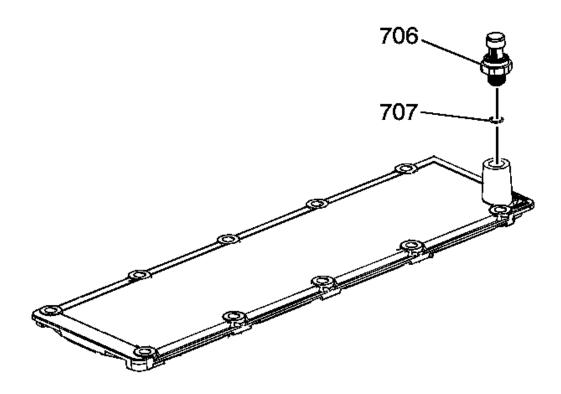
Removing/Installing Oil Pressure Sensor & Washer Courtesy of GENERAL MOTORS CORP.
